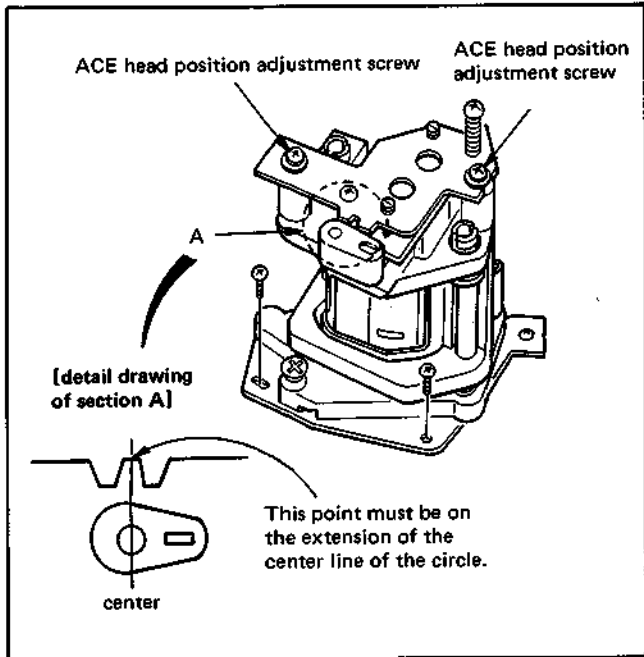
Position Adjustment of ACE Assembly (2)
